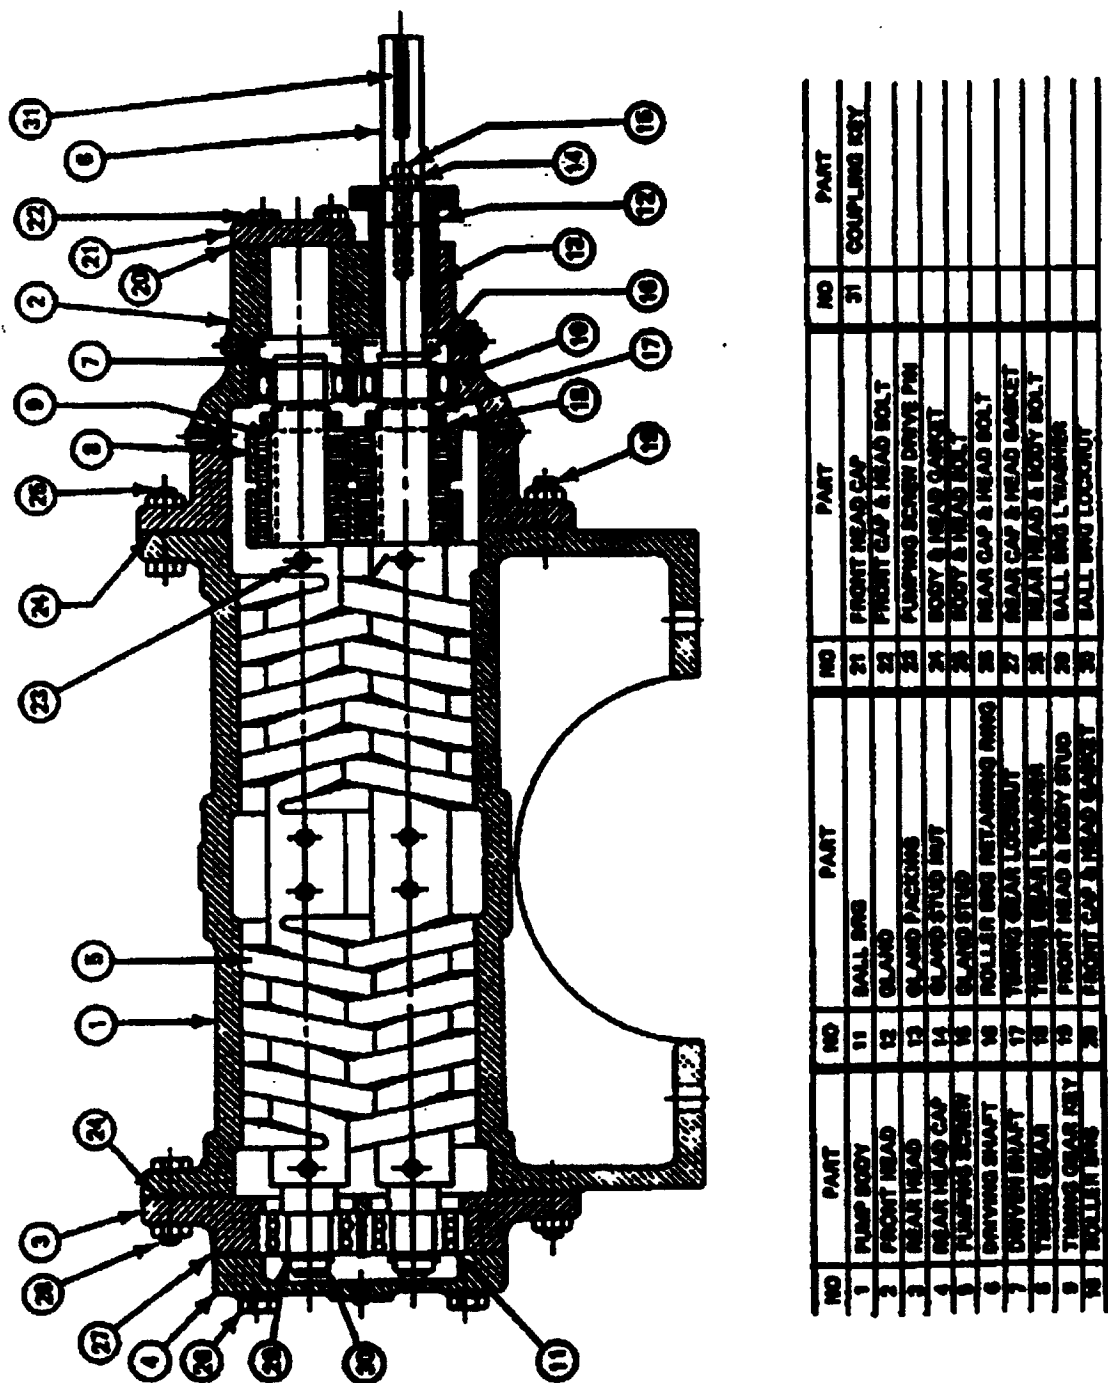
Worthington Screw Pump with Timing Gears
